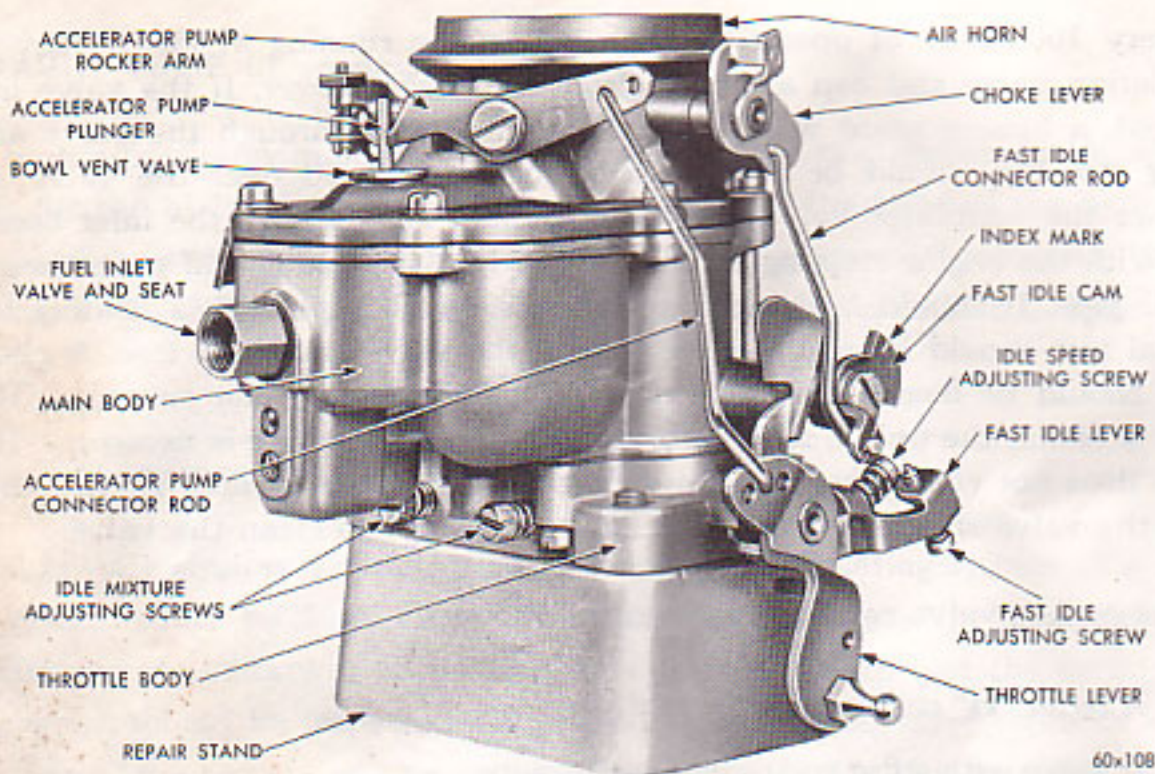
Carburetor Assembly BBD Series Used on Models M-318A
